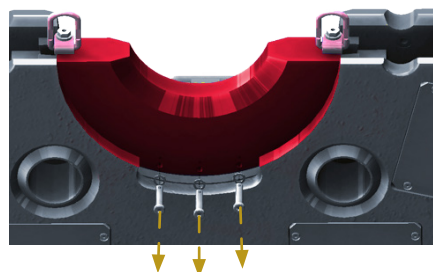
Loosen and Remove Mounting Bolts and Washers
